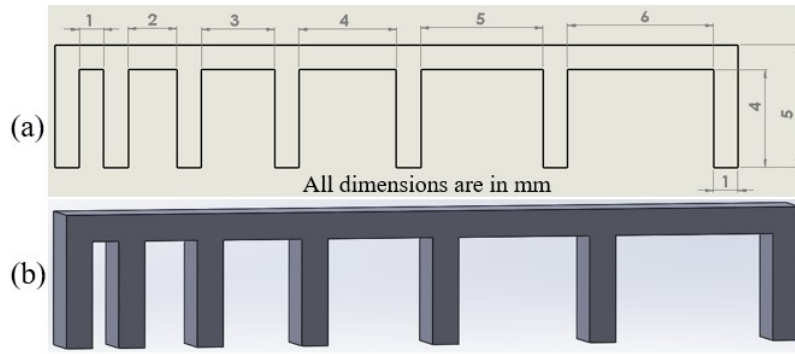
(a) 2D view of bridge (Unit: mm); (b) 3D view of bridge
